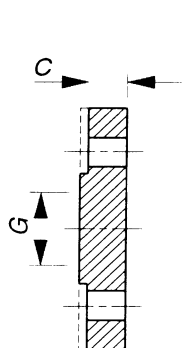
Dimensions of Class 900 flanges (see Table 12)
